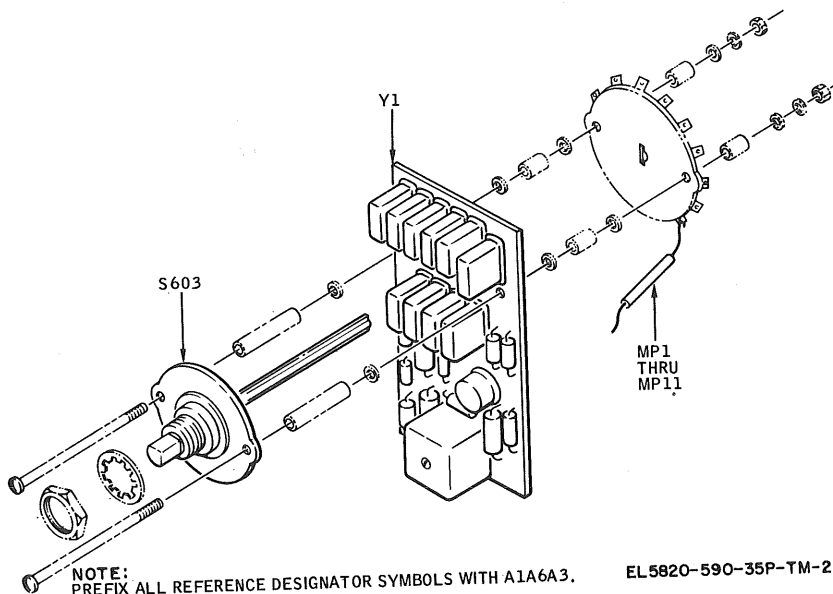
Frequency synthesizer module, switch A3 disassembly.
